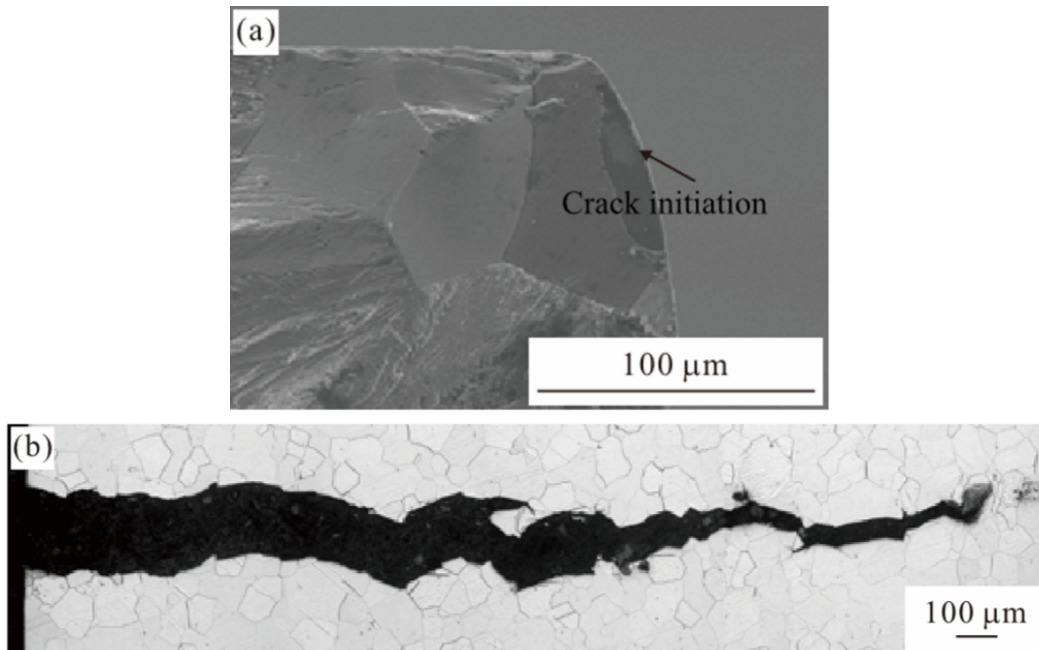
(a) Fracture surface of electrical steel 30WGP1600 (b) crack growth of 30WGP1600 showing the crack initiate from the surface and show trans-granular fracture through grain boundaries as the main crack propagation mechanism [27]
